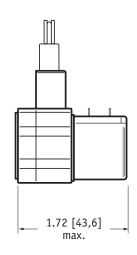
Outline Drawing (w/o mounting bracket):
